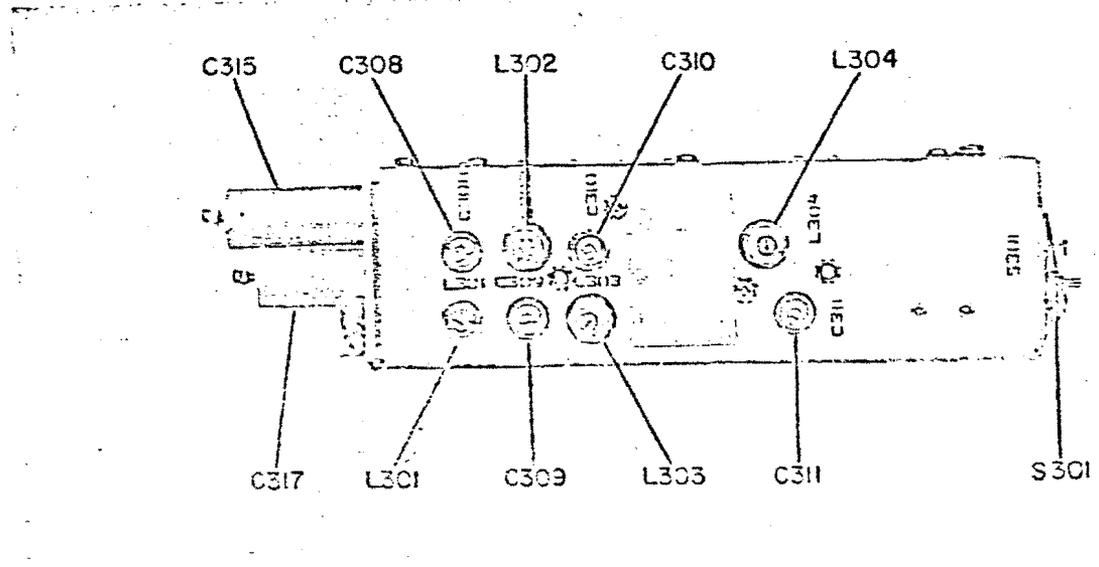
High-Frequency Oscillator, Left Side View, Location of Parts
